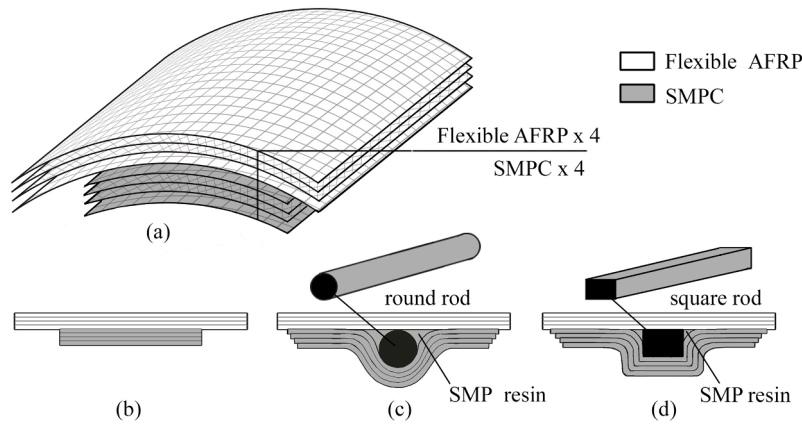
Connection between SMP and flexible AFRP:(a) 4-layer flexible AFRP with SMPC laminates; (b) cross-section of laminates; and (c) and (d) schematics of connections with circular and square rods, respectively, where SMP resin can be used to fill the seams.
